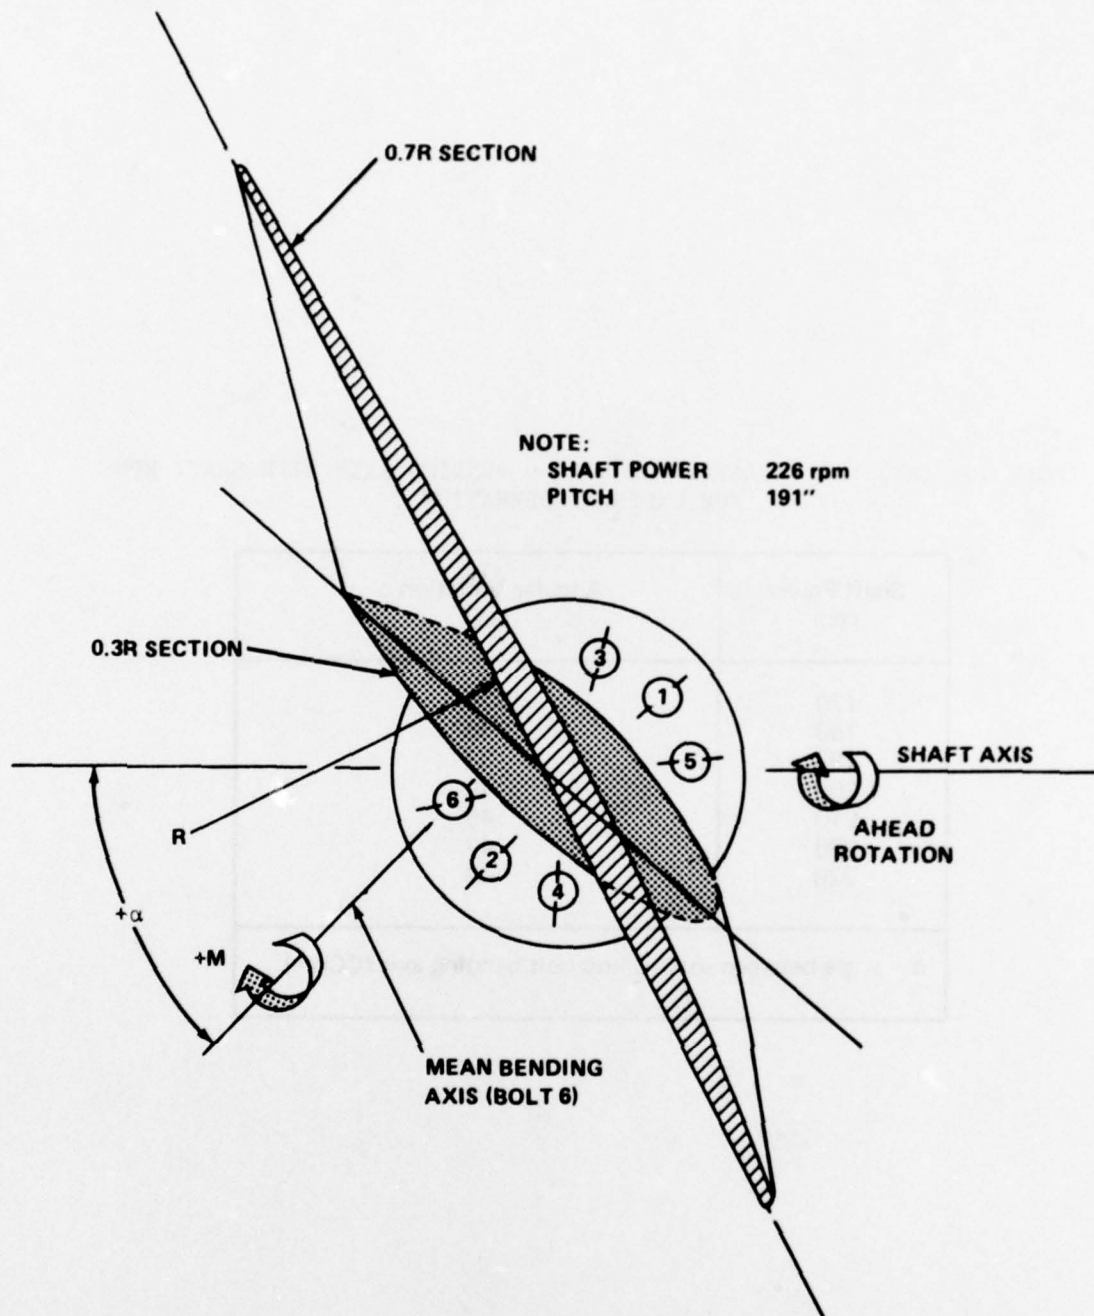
Bending Axis of Bolt 6 for Full-Power, Underway Operation
